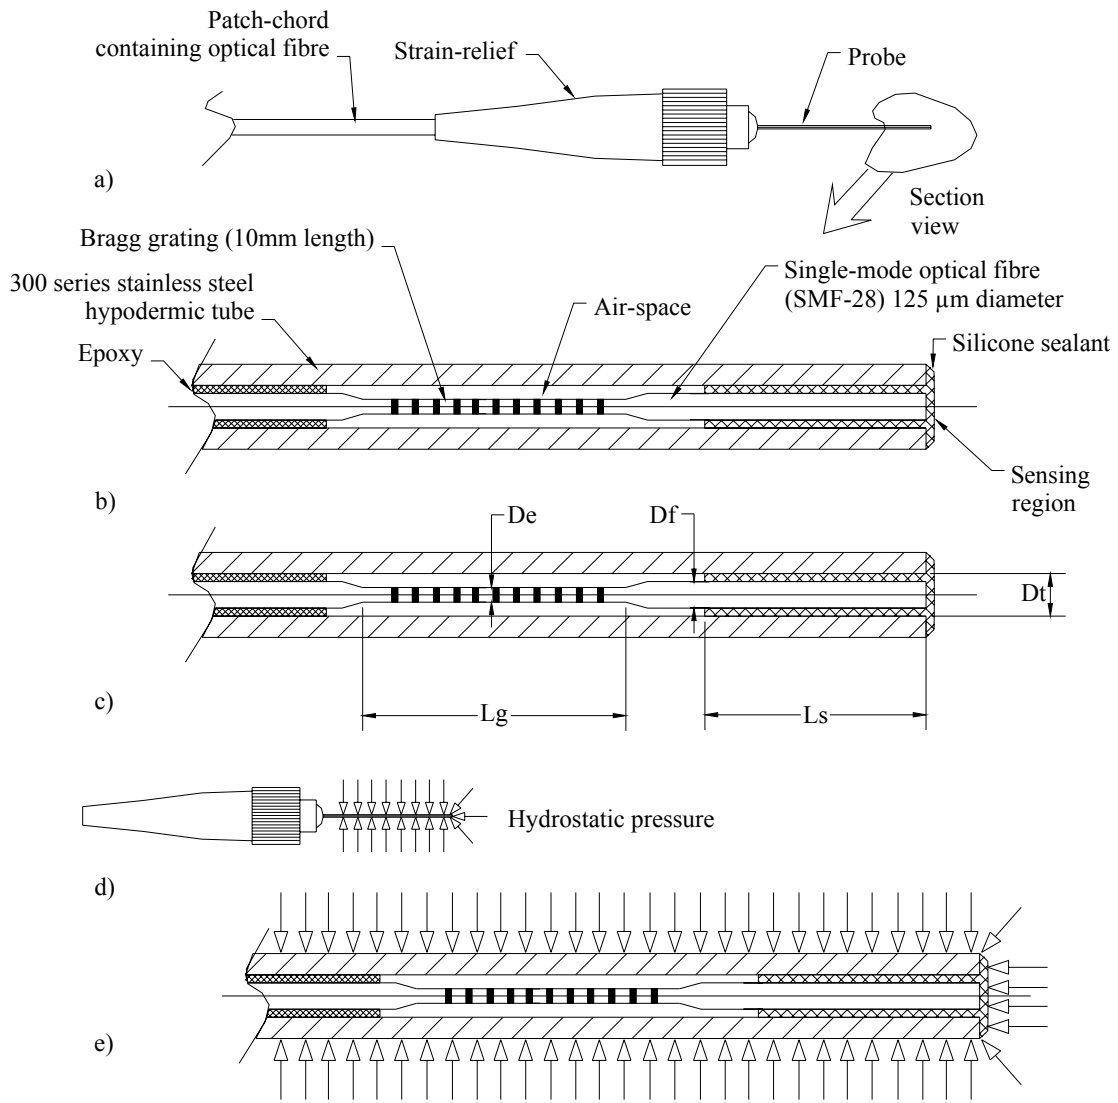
a) schematic of FBG sensor showing external features: probe, strain-relief, and patch-chord b) section view of probe tip showing internal construction of sensor; c) section view of probe tip showing sensor design features that were varied in the finite-element study; d) schematic showing applied hydrostatic pressure on the probe; and e) schematic showing that hydrostatic pressure is applied to both the outer surface of the hypodermic tube and the exposed silicone.
